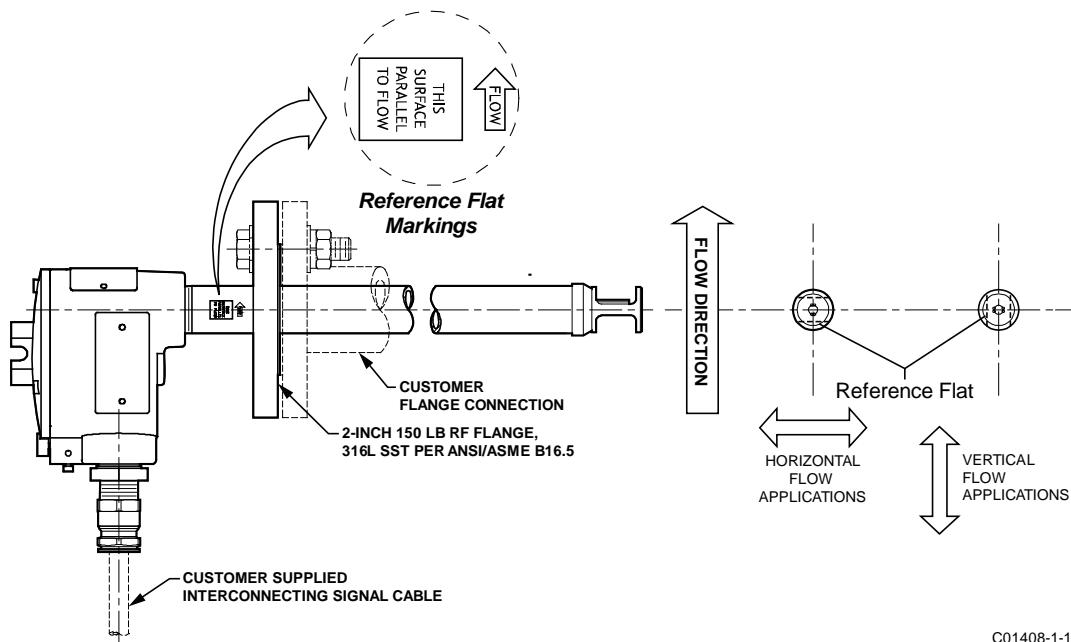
MT100S: Single Point Flow Element Showing Flat Area, Flange Mount
